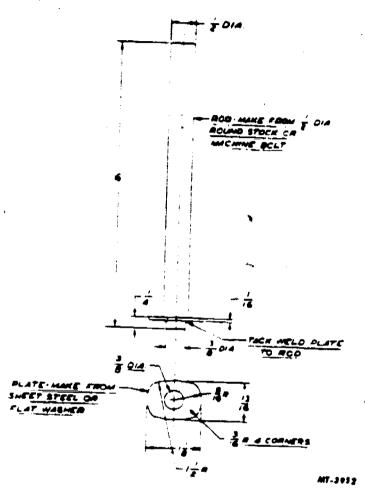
Spring Compressor Tool to Assist in Valve Spring Retaining Ring Installation.
